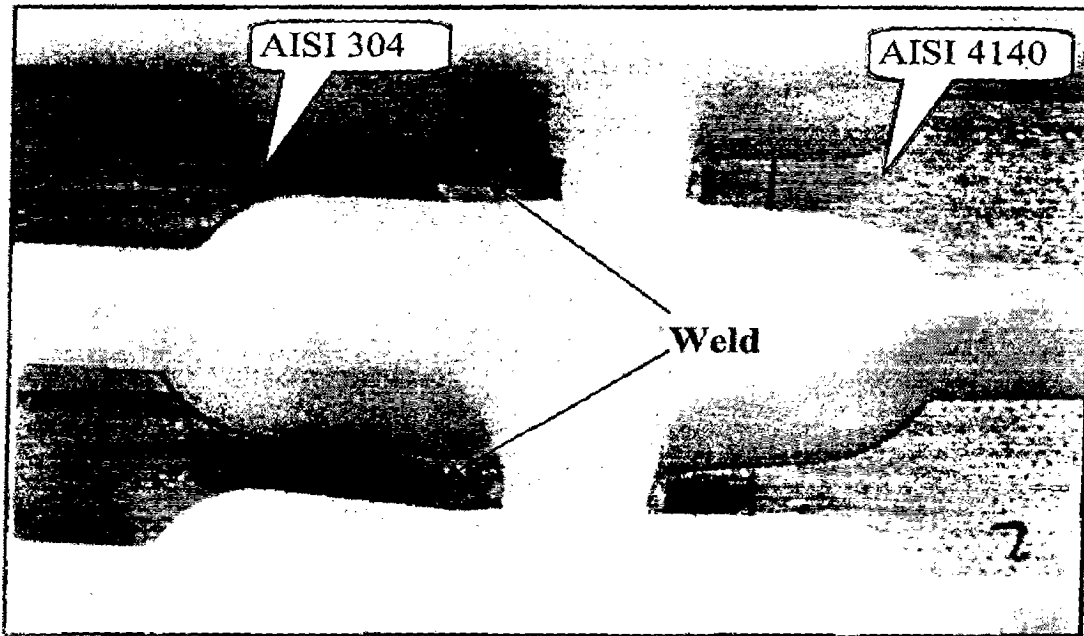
Photograph for tensile fractured TIG welded AISI 4140 and AISI 304
